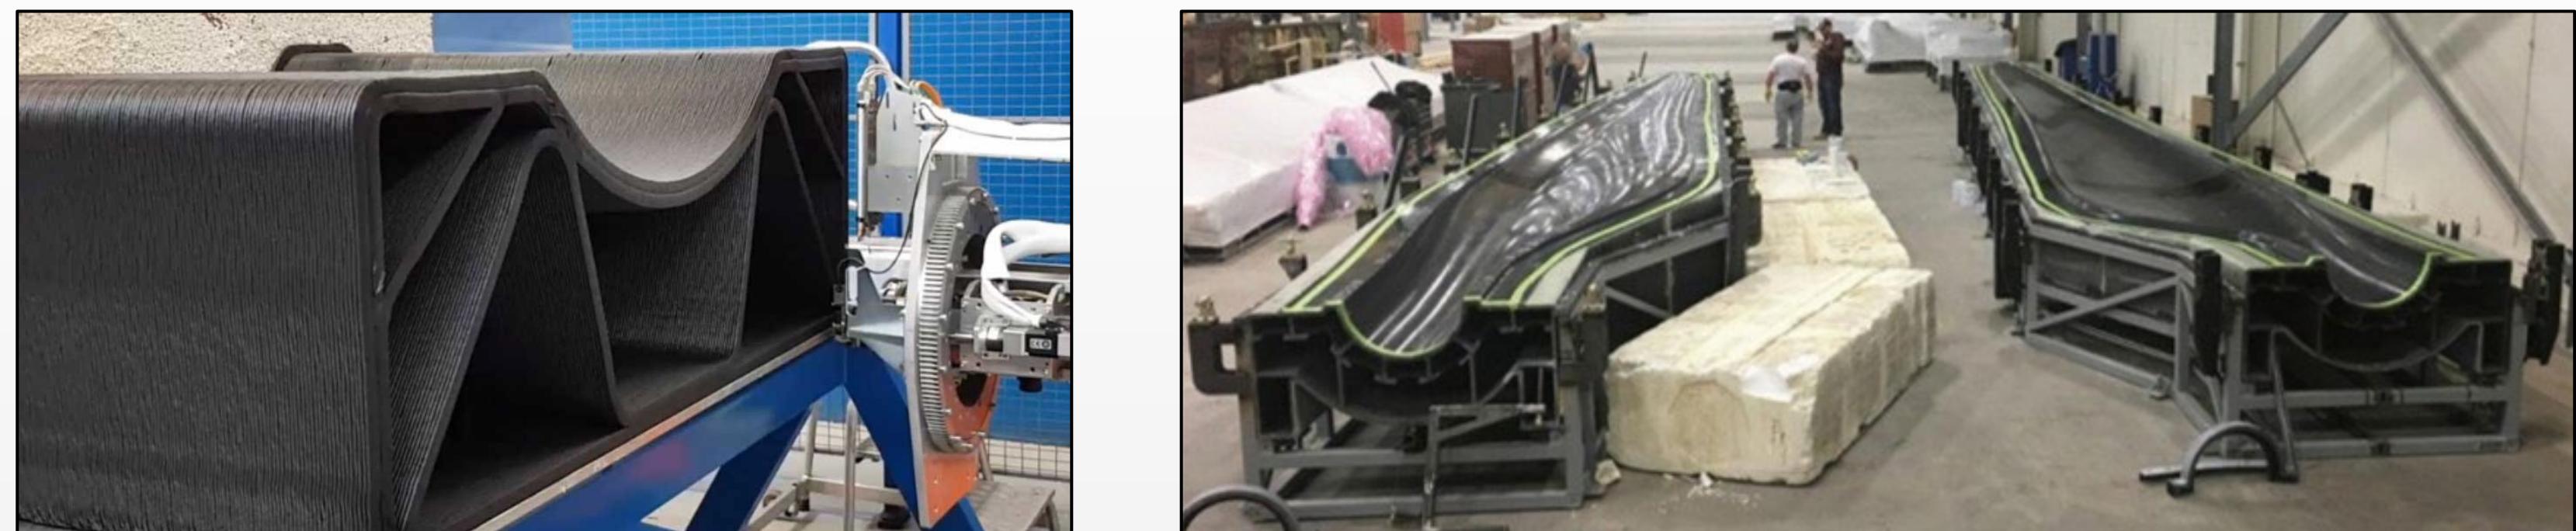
Example 3D printed tooling (left) and mold usage in industry (right)
